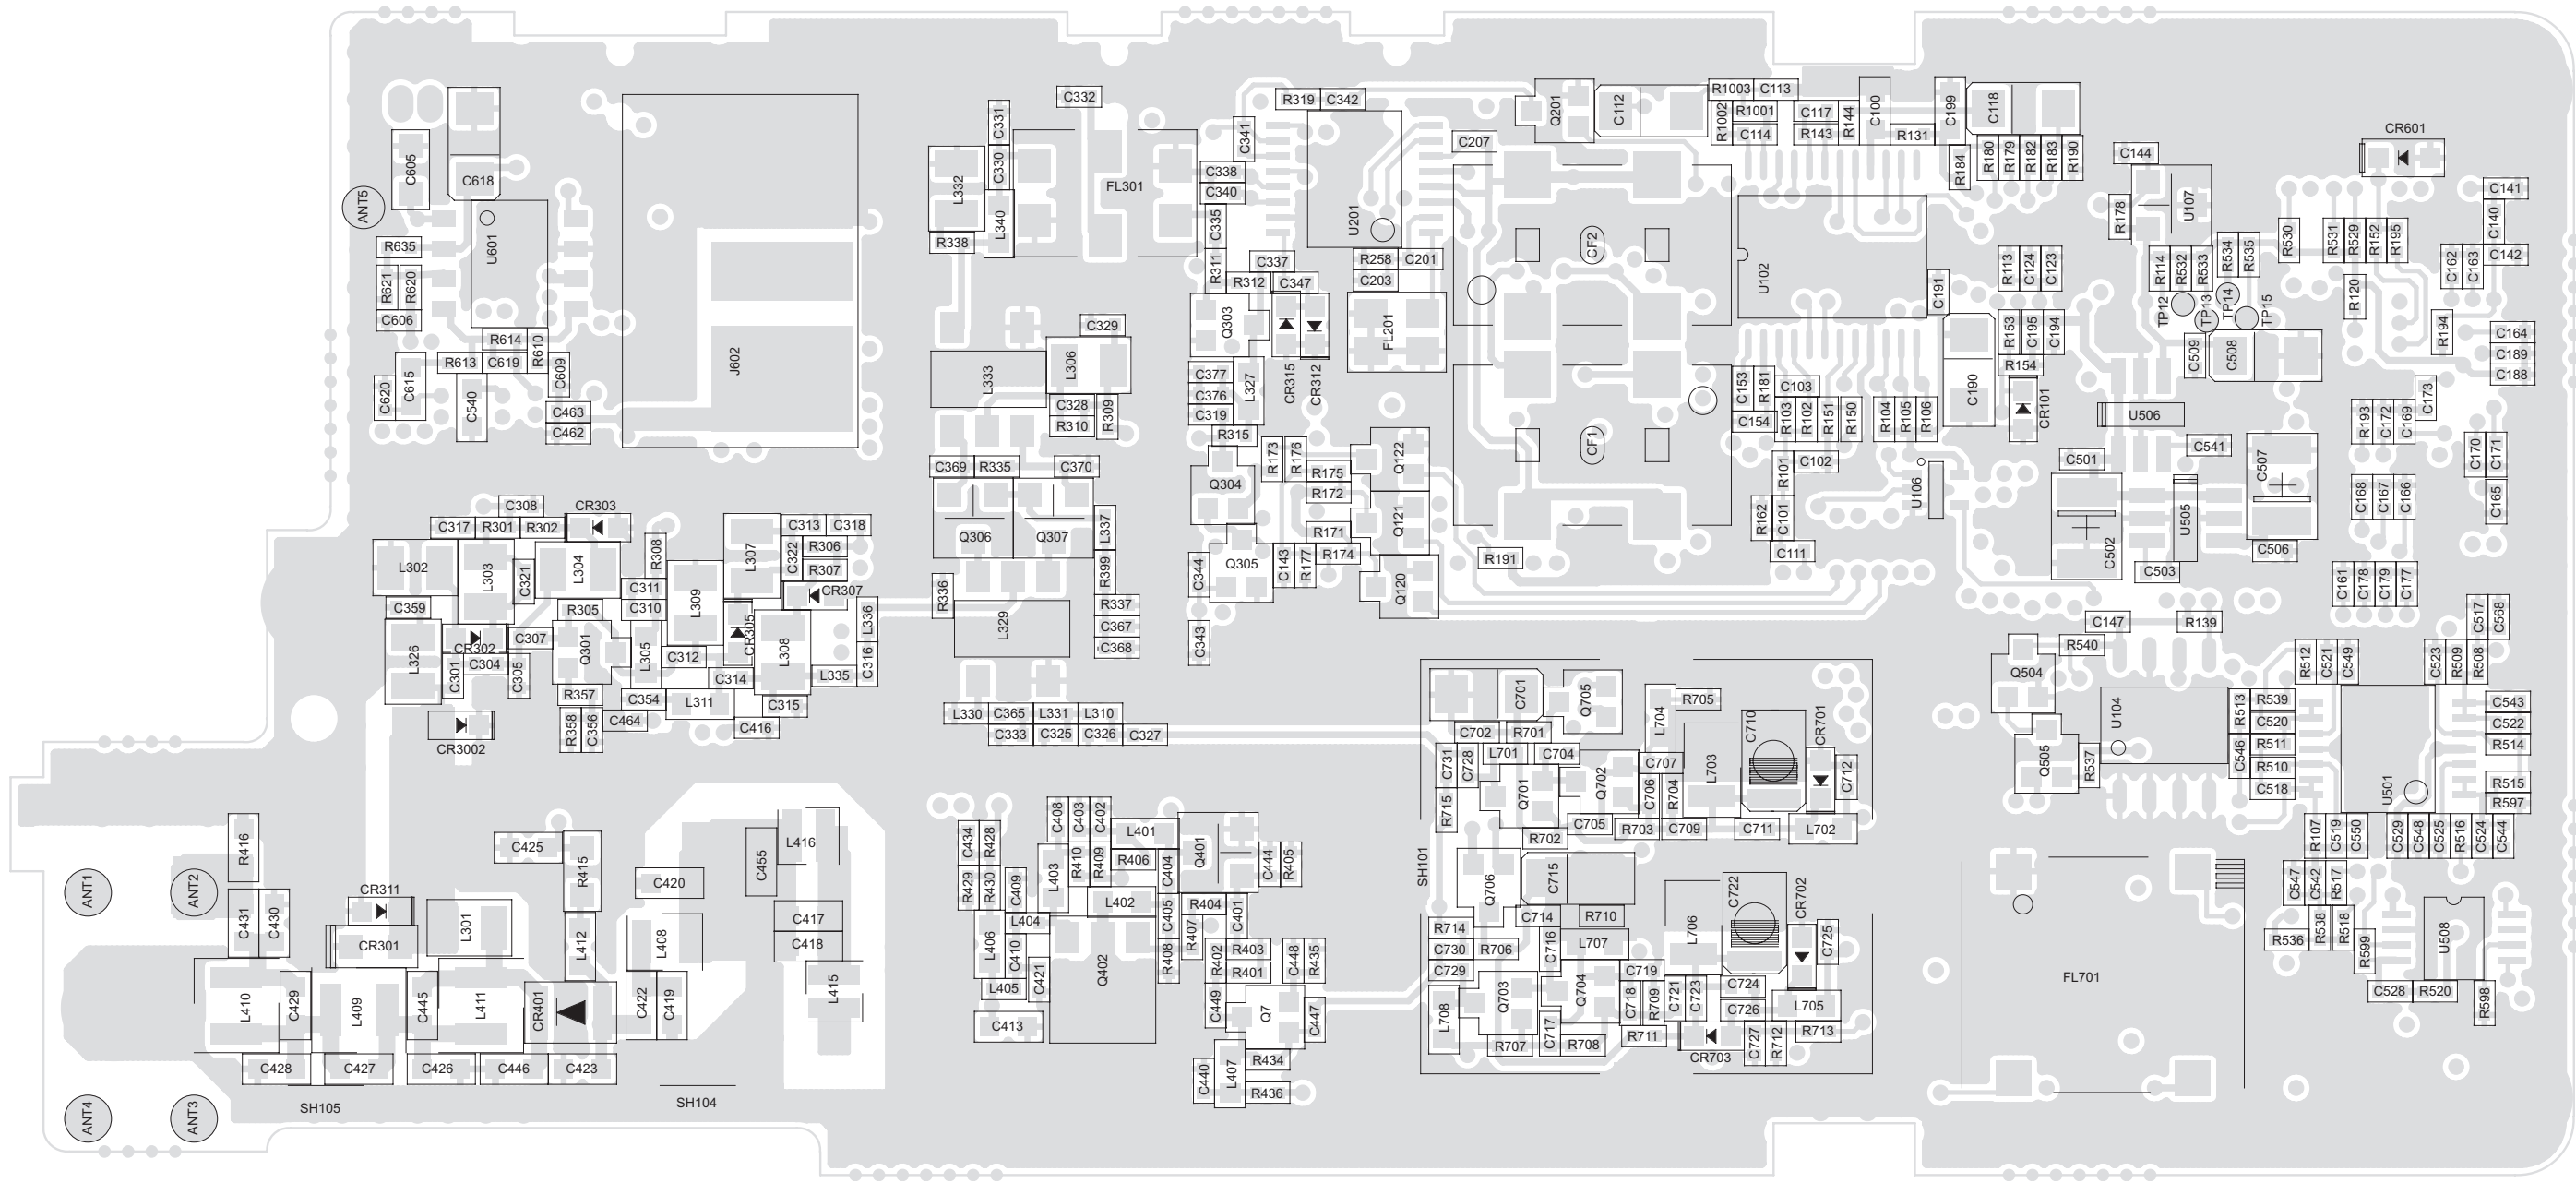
VHF (136–174 MHz) Mainboard Bottom Side: PCB No.E11-000997-00
